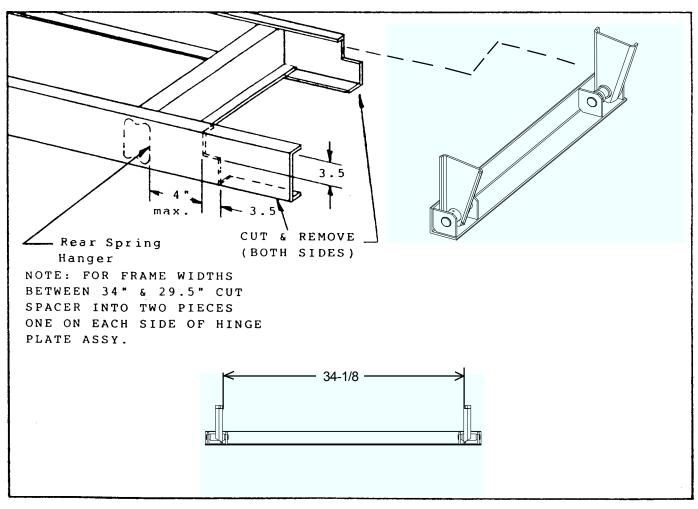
FRAME MODIFICATION AND REAR HINGE ATTACHMENT
